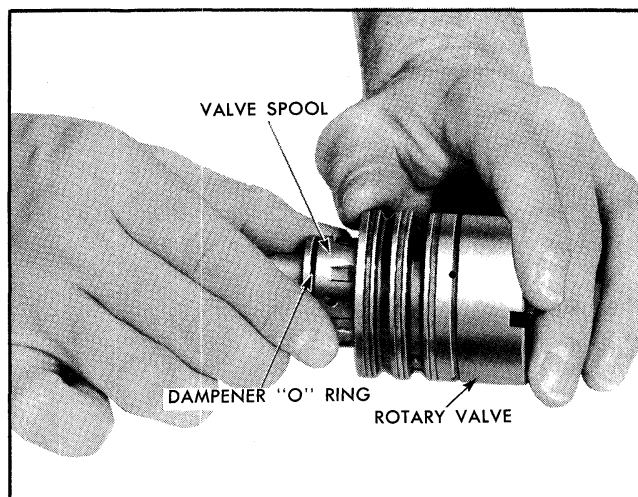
A-15 Removing Valve Spool from Rotary Valve
